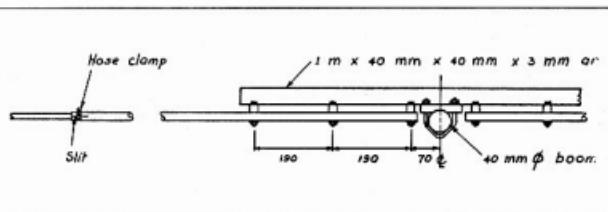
Construction Details. The angle is aluminium and clamped to the aluminium boom using standard TV antenna fittings. Each element consists of four lengths of aluminium tubing fitted together by using a hacksaw to make a slot in the larger tube, sliding the smaller tube inside about 75mm (3") and clamping with a stainless steel hose clamp. Element details: 22mm dia (7/8") 1.50m; 16mm dia (5/8") 1.30m; 12.5mm dia (1/2") 1.275m; 9.5mm dia (3/8") 1.185m. See figure 4 for details of element to angle mount.
